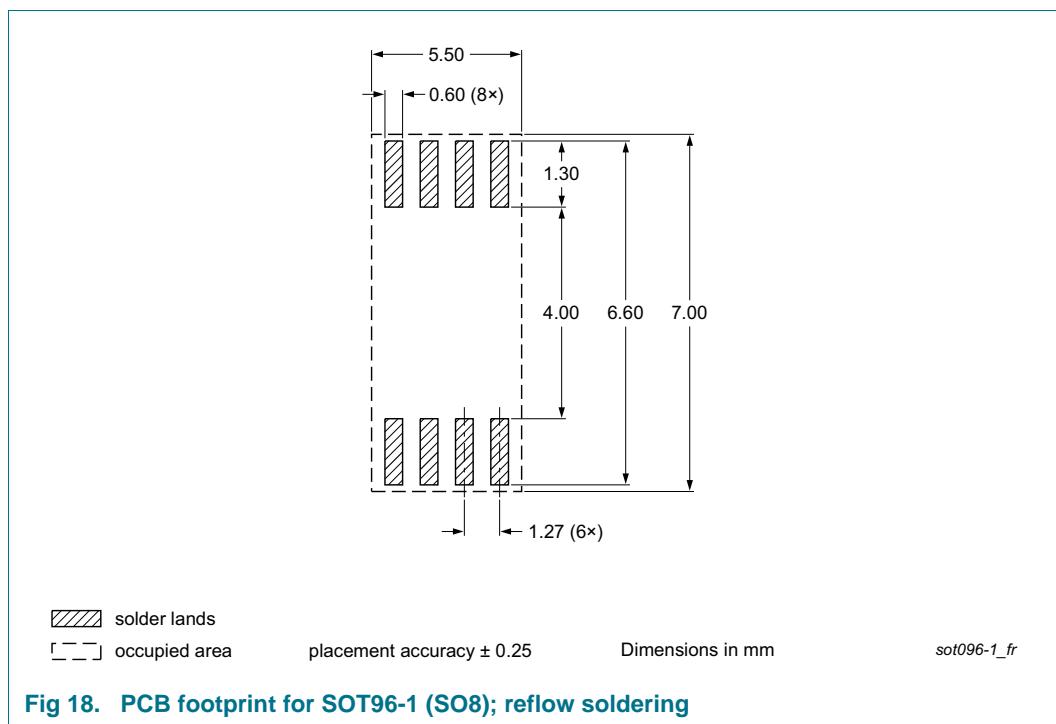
PCB footprint for SOT96-1 (SO8); reflow soldering
